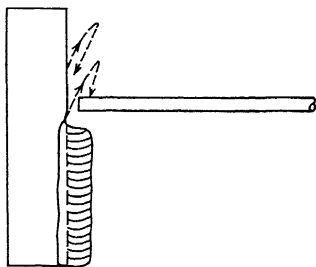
Position of electrode in up and down motion in making a vertical fillet weld.
